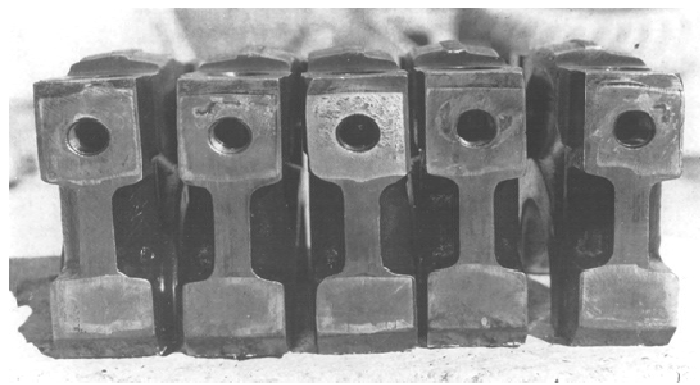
Fretting on the side surfaces of the main bearing caps after operating for 10230 hours
